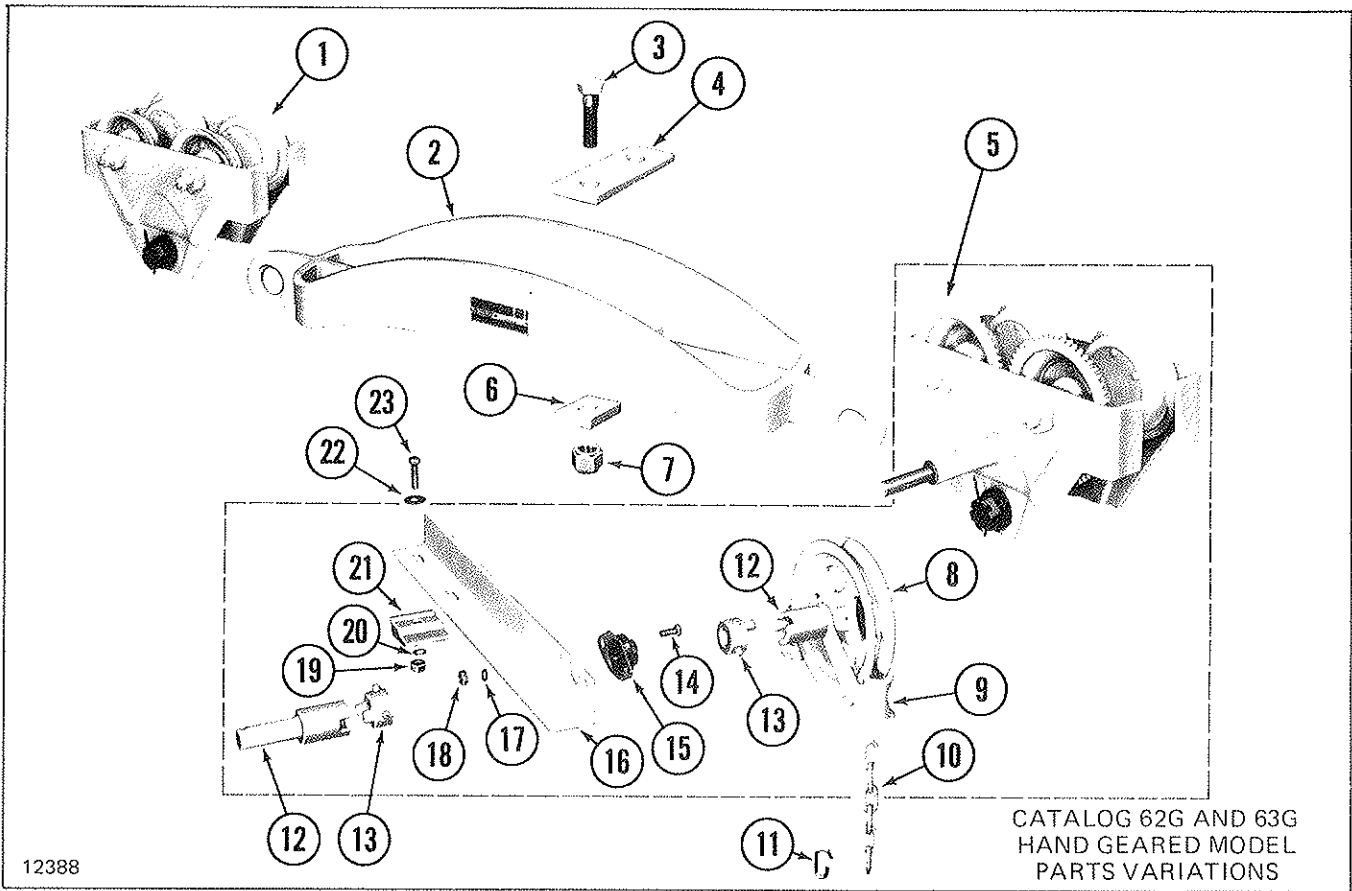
DRIVE (GEARED) TROLLEY PARTS
